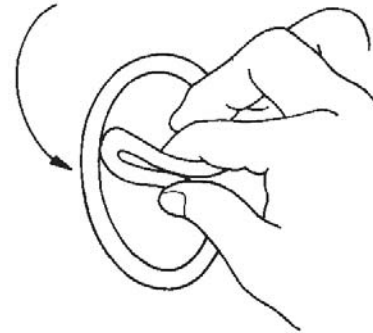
Inserting a seal into the inner circumference of rod cover.
